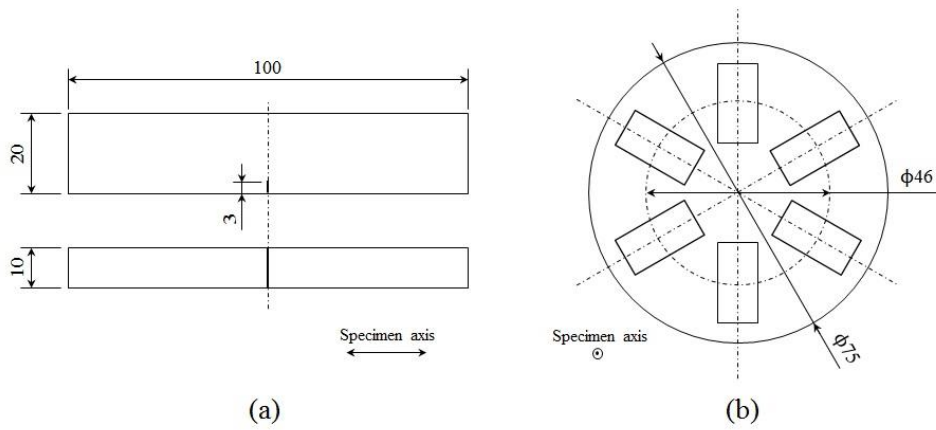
Shape and dimensions (in mm) of the four-point bending test specimen: (a) rectangular specimen, (b) position from which rectangular plates were extracted from the round steel bar.
